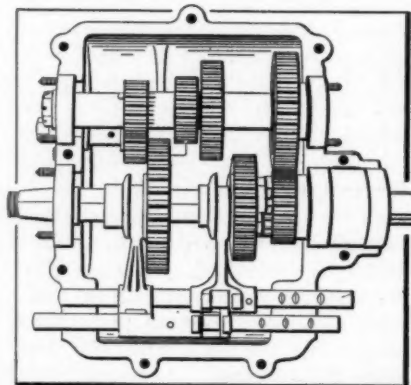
Looking into the transmission gearset showing stout shafts rolling on annular type ball bearings
